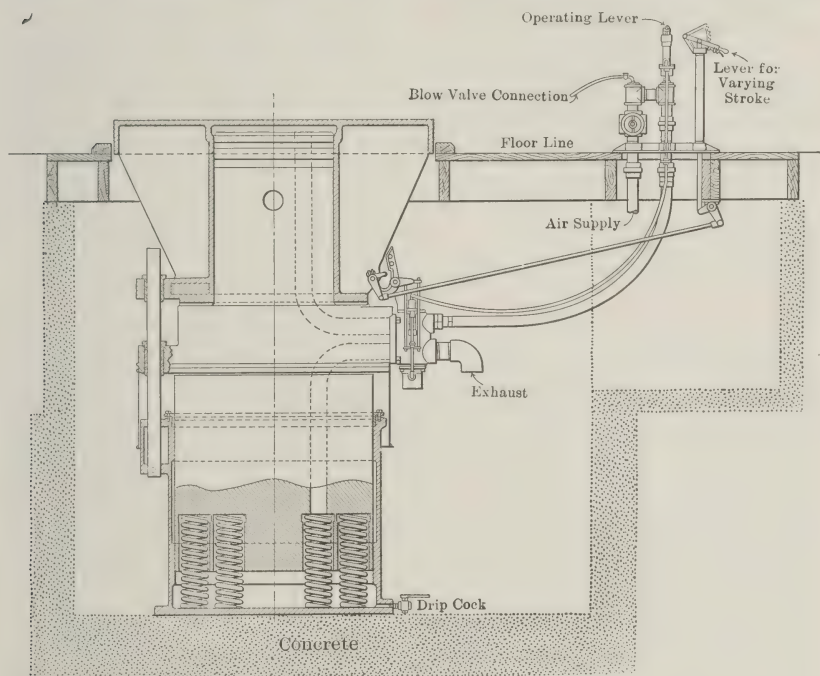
SECTION OF MACHINE TO HANDLE MOLDS WEIGHING 25 TONS
